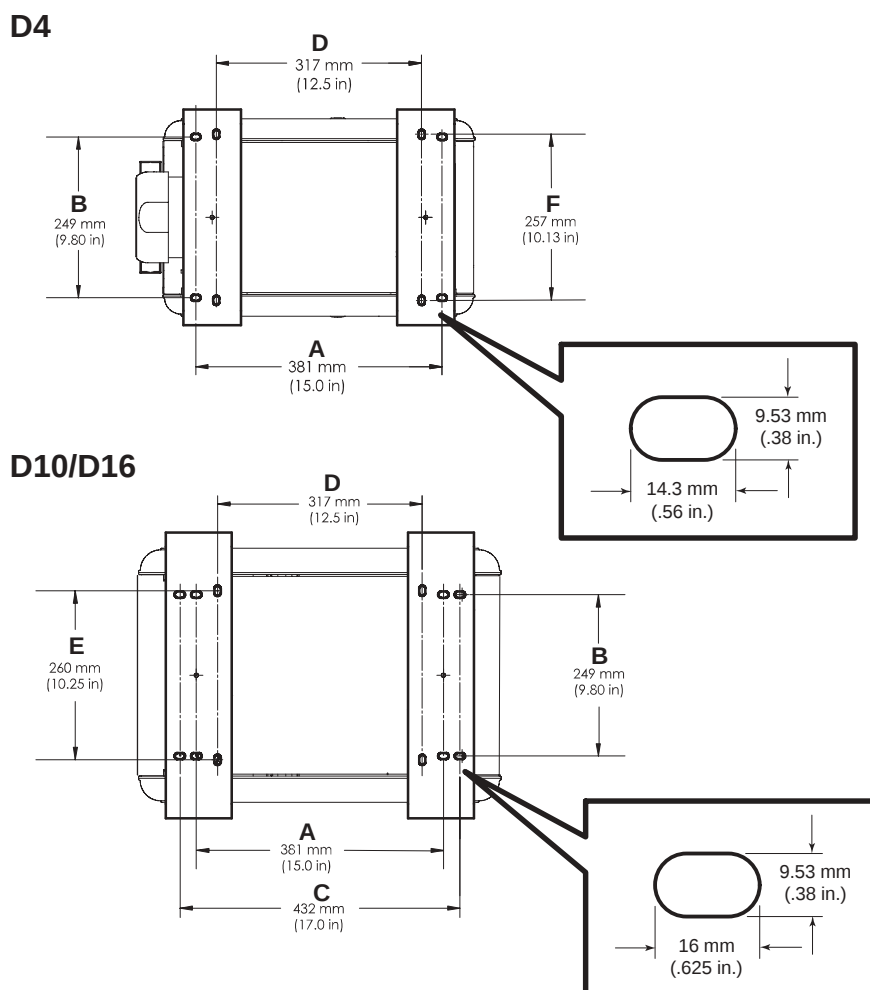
Bolt mounting patterns (Refer to Table 3-2)
